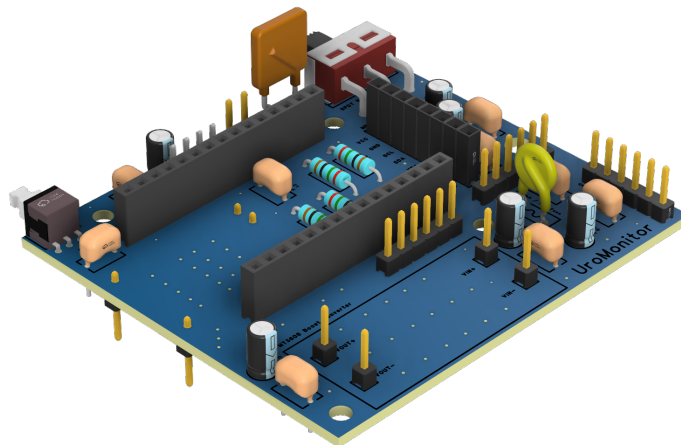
3D render of the assembled PCB within EasyEDA, showing component stacking and spatial arrangement.
